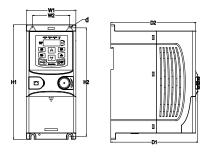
Wall mounting of 0.75–2.2kW VFDs (Dimension unit: mm)
